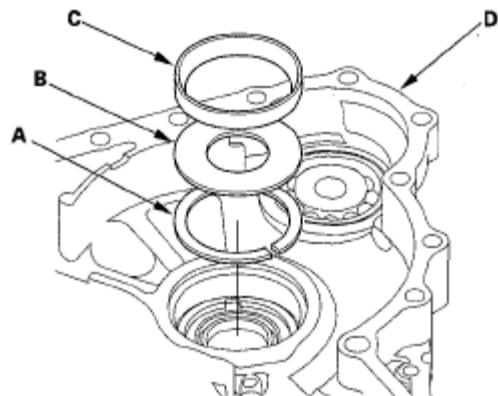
Identifying Thrust Shim, Spacer And Outer Race
